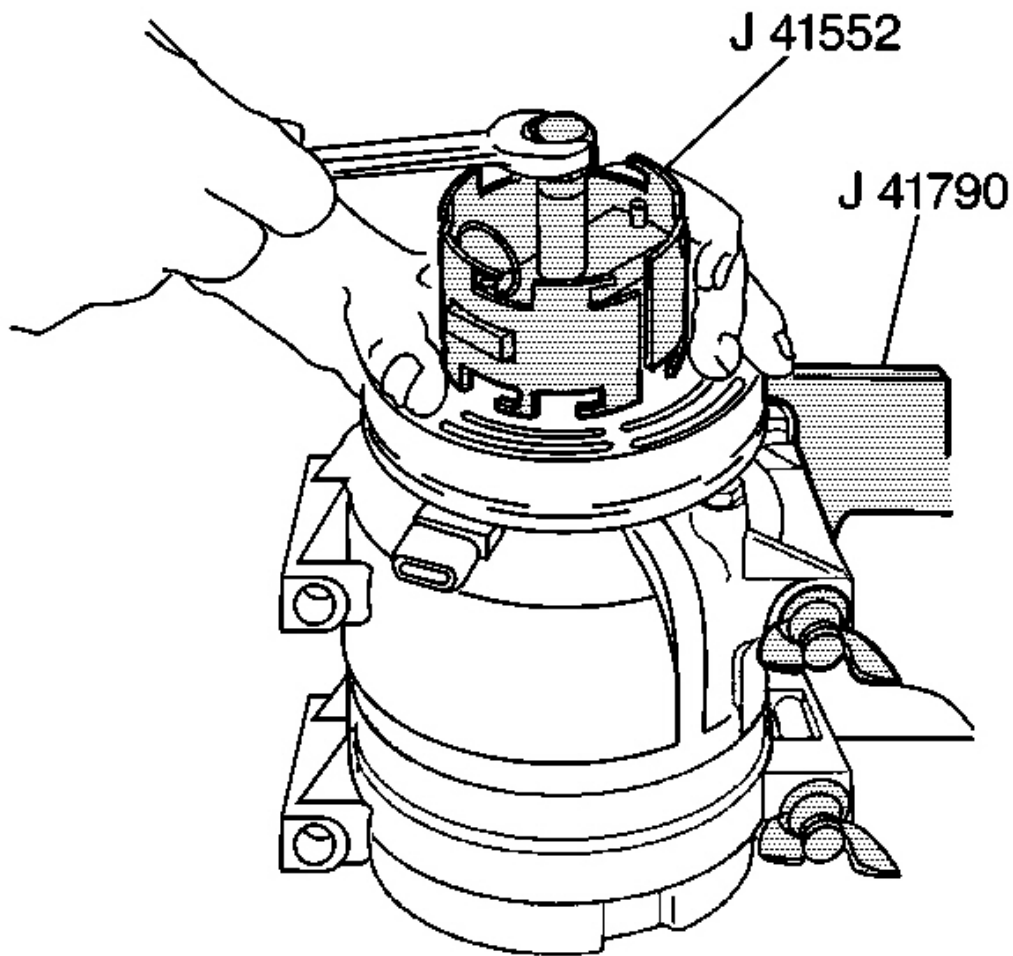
J 41552 & Inner Circle Slots Of Rotor
